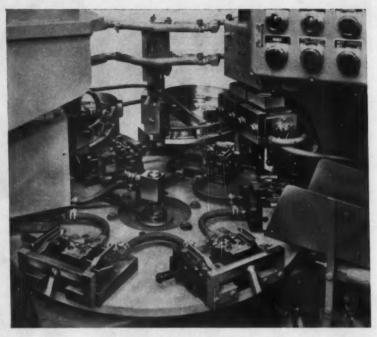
Geneva dial-feed table of Precision AVB-3 welding machine with loading, assembling, forming, welding, and ejection stations
